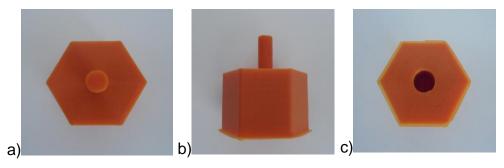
Insulating component: a) Top view, b) front view, c) bottom view
